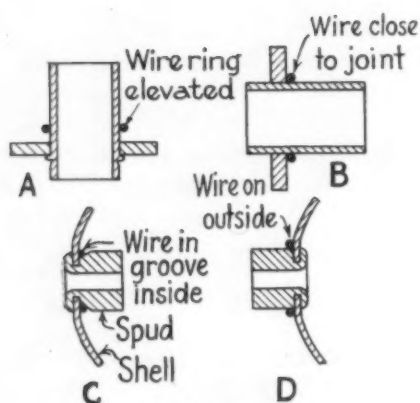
Different methods of attaching wire rings to parts preparatory to furnace brazing: A, vertical axis, ring above joint; B, horizontal axis, ring close to joint; C, inside spud, wire in groove inside; and D, outside spud, wire outside against shell.
